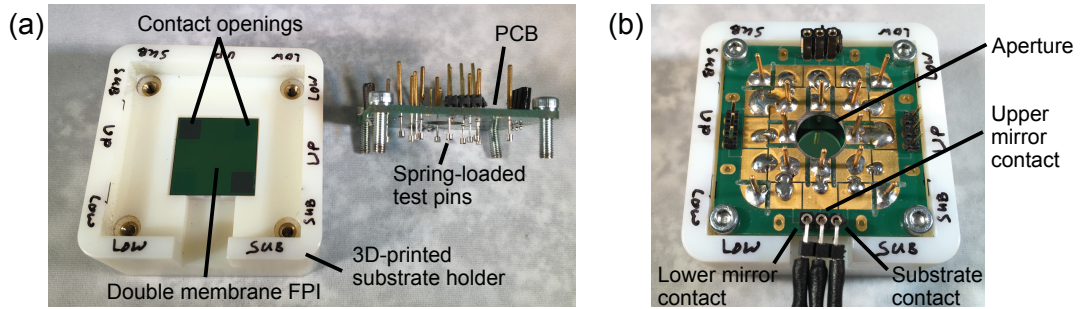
Custom 3D-printed chip holder for fast electrical contacting of FPIs. (a) Before assembly: FPI inserted into the holder and side view of top PCB. (b) After assembly: PCB screwed to the chip holder.
